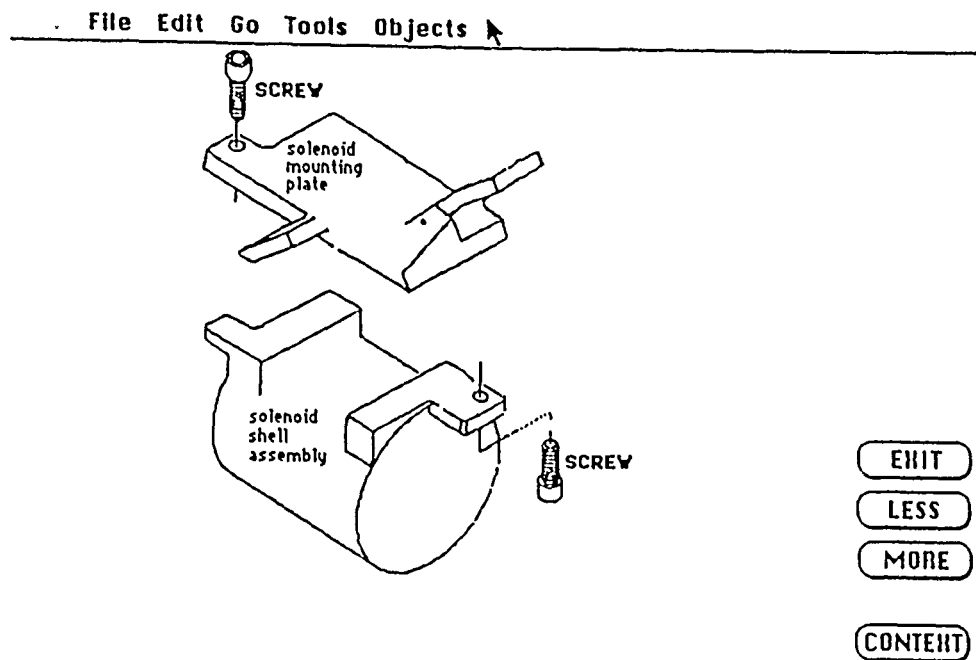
Clearing Solenoid Assembly: Zero-Order Fisheye View.
